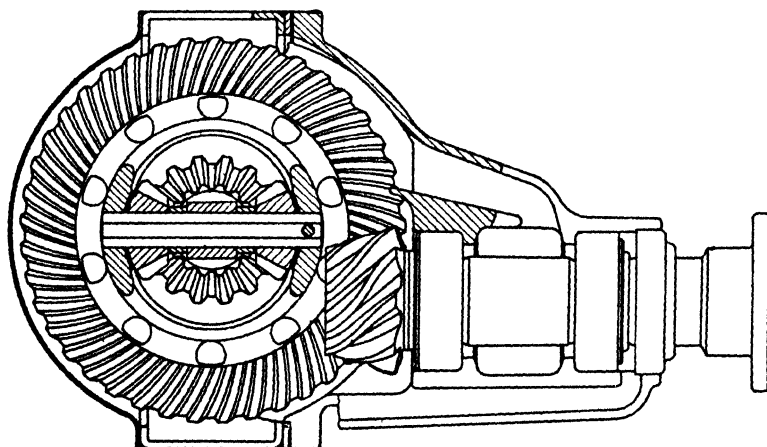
HYPOID-GEAR ASSEMBLY WITH OVERHUNG PINION MOUNTING.
